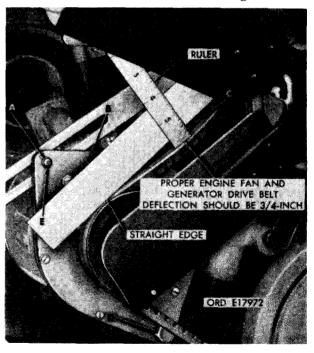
ADJUSTING ENGINE FAN AND GENERATOR DRIVE BELT DEFLECTION.
